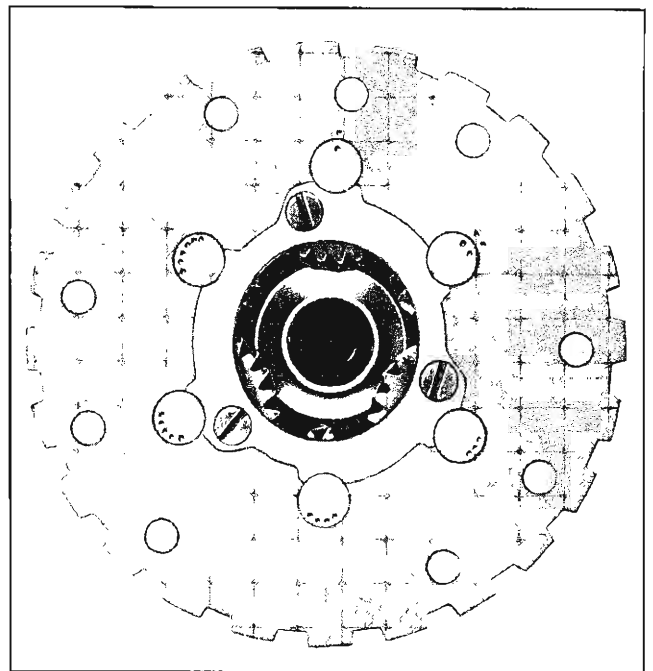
PG—Suggested Pinion Shaft Markings (Small Gear Set)
